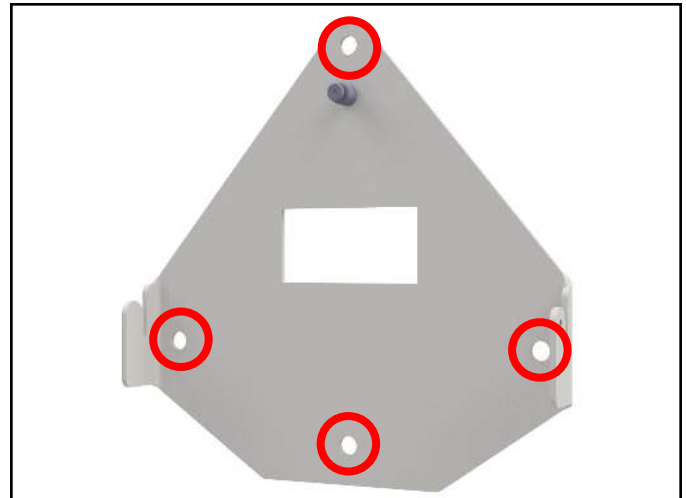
Mounting holes on the Combo Tester X3 Plus mounting bracket
